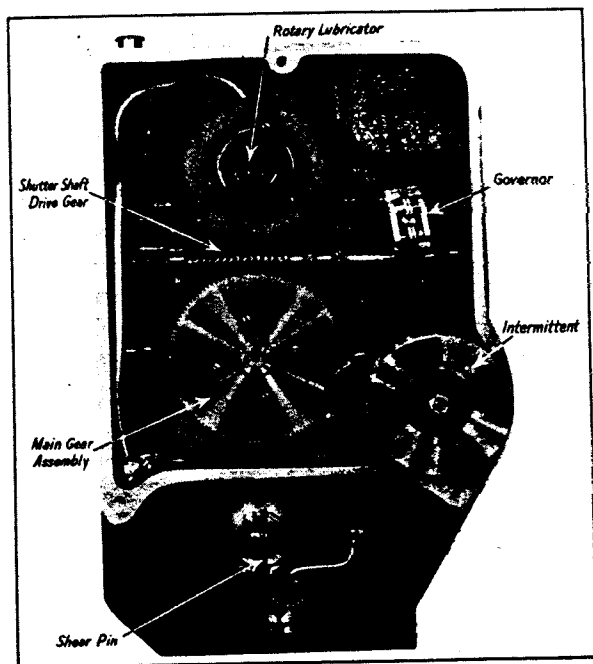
Gear Side of Brenkert BX-60 and BX-62 Projector Mechanism
